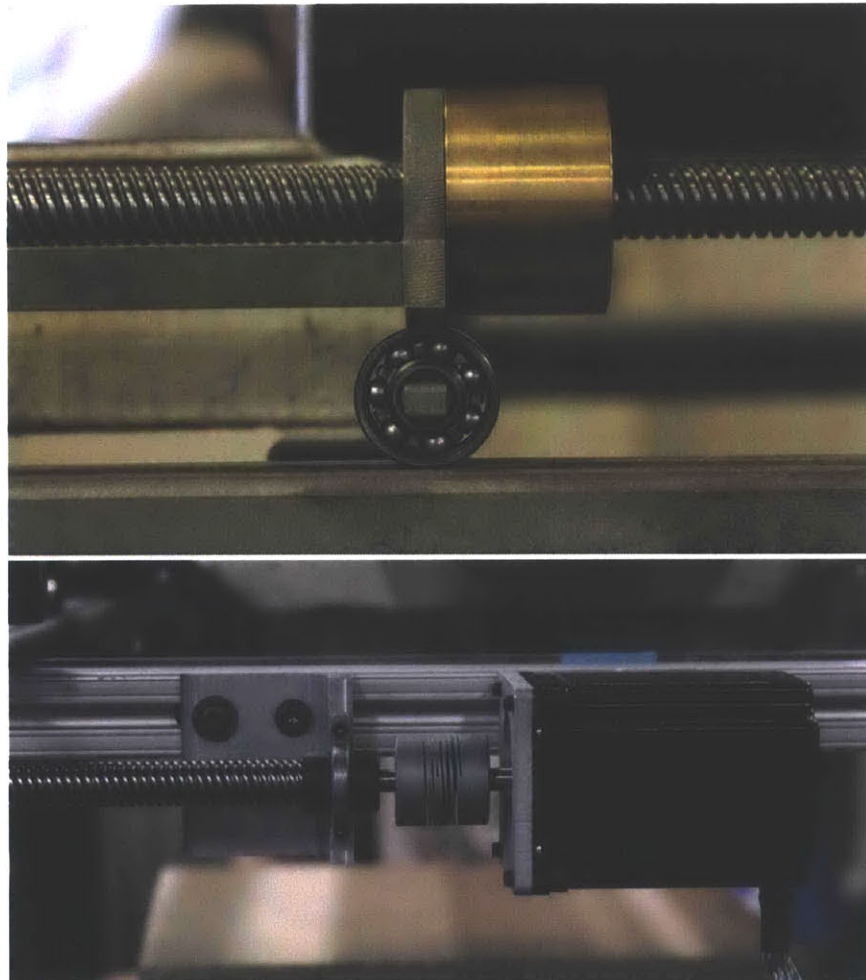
Stepper motor connected to ACME lead screws with flex. helical coupling
